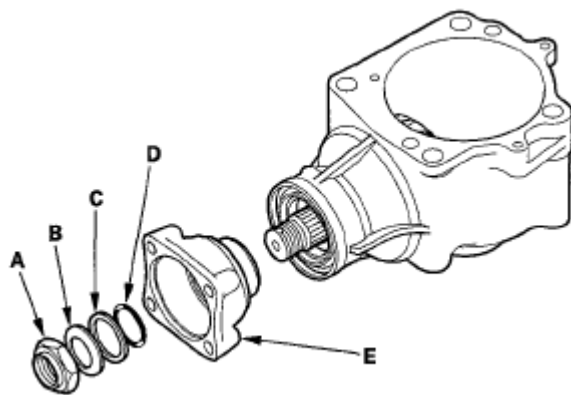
Identifying Transfer Output Shaft Locknut, Conical Spring Washer, Back-Up Ring And O-Ring
